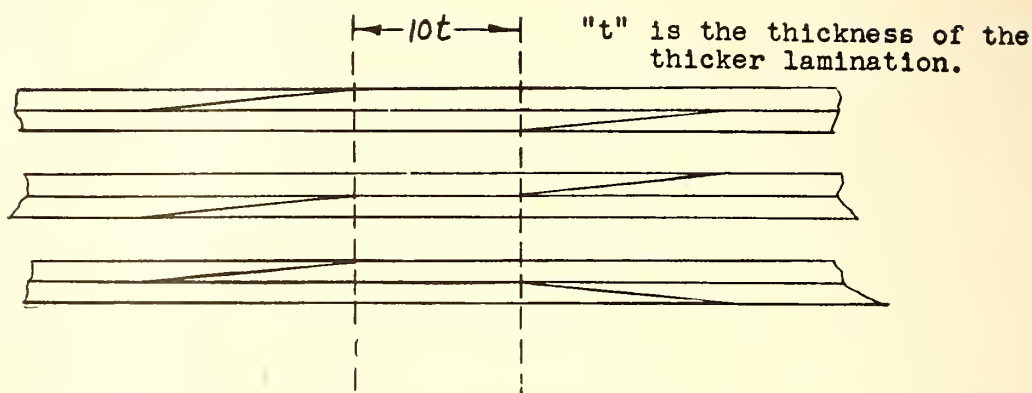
Minimum Permissible Longitudinal Separation of Scarf Joints in Adjacent Laminations. particular species, the piece should be reinforced to prevent splitting by gluing plywood reinforcing plates to the faces (fig. 4-19).
